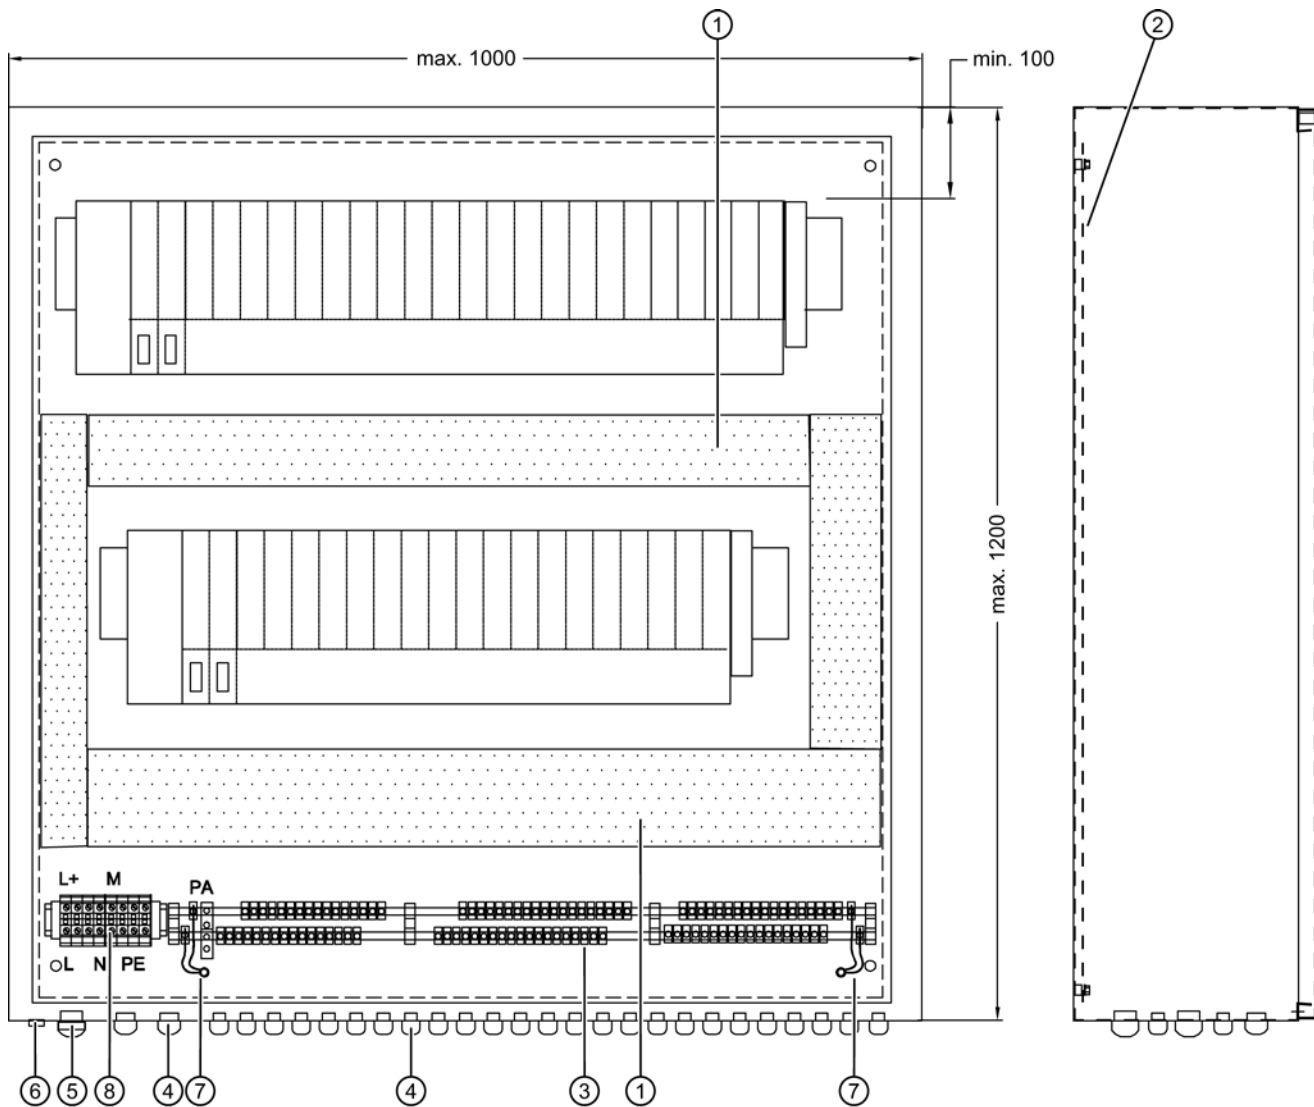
Dimensional drawing of wall-mounted enclosure 6DL2804-0xD...Gxx with installation of ET200 iSP components
